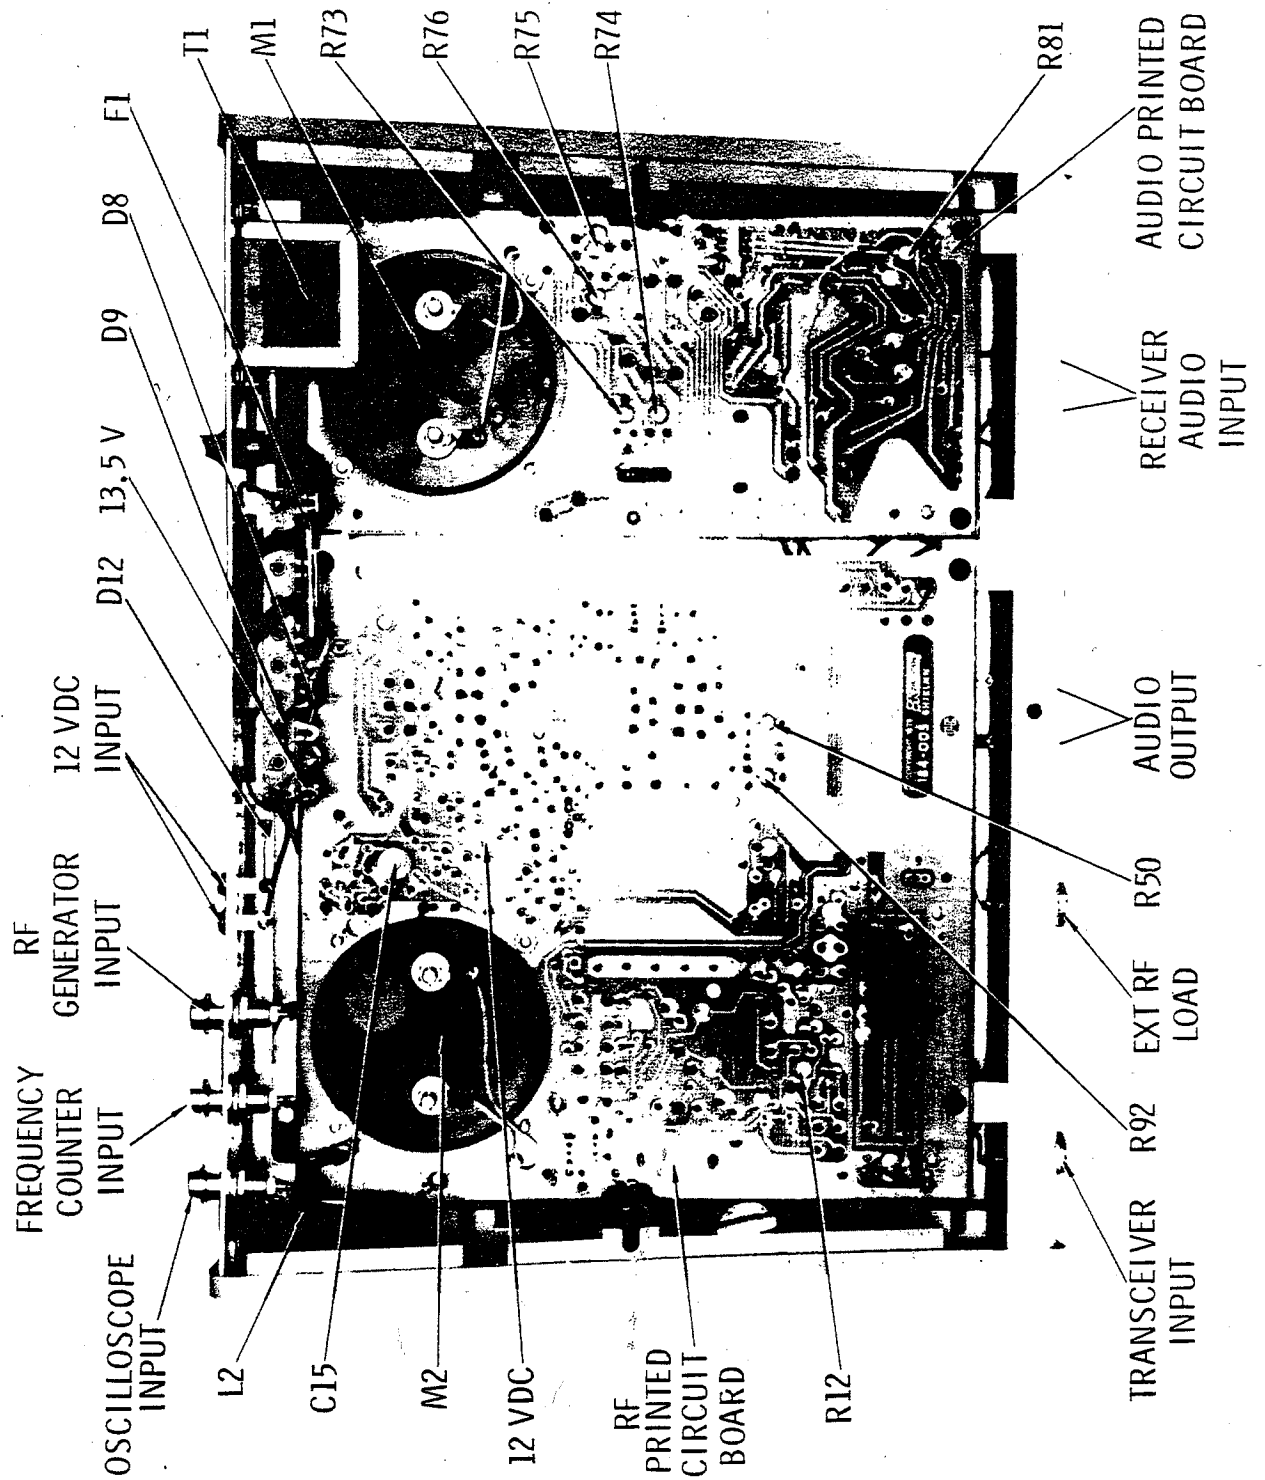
Bottom View of Chassis, Parts Location and Adjustment Points.
